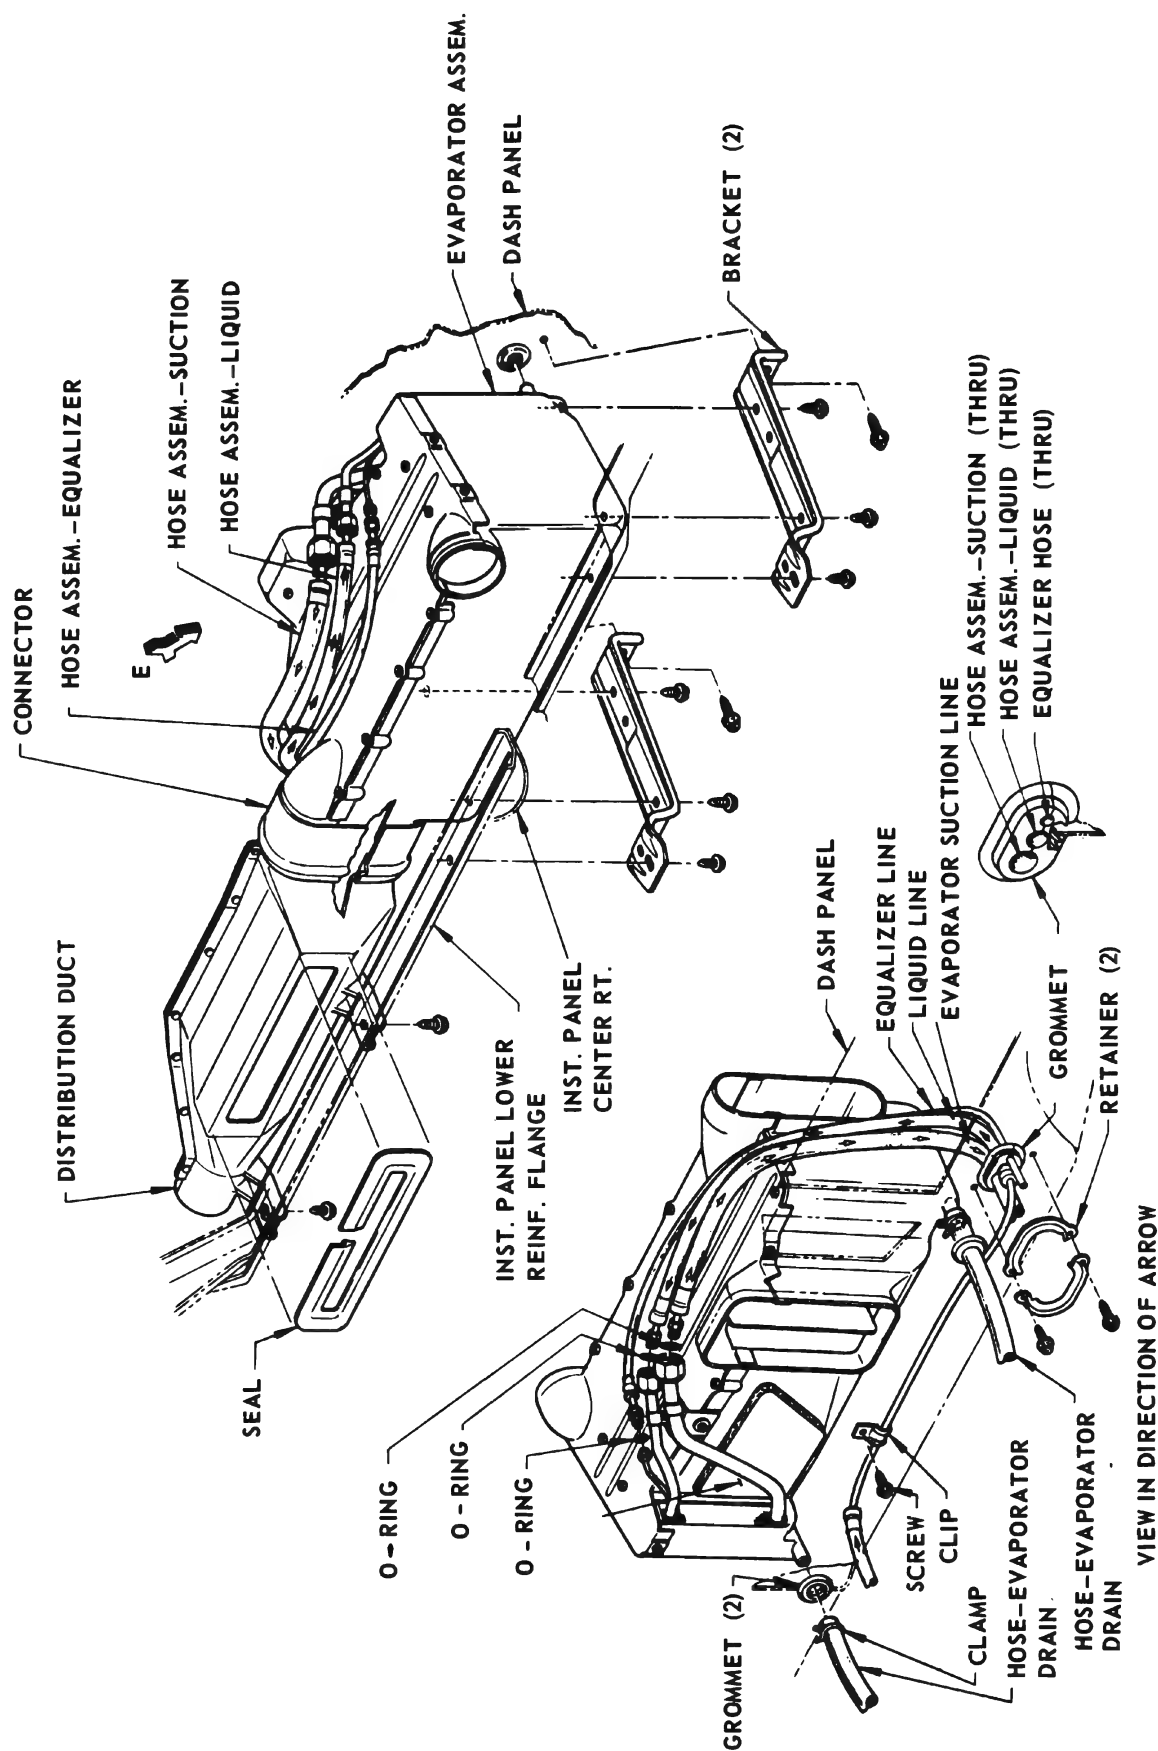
Evaporator and Distributor Duct Installation - 4700 Series
